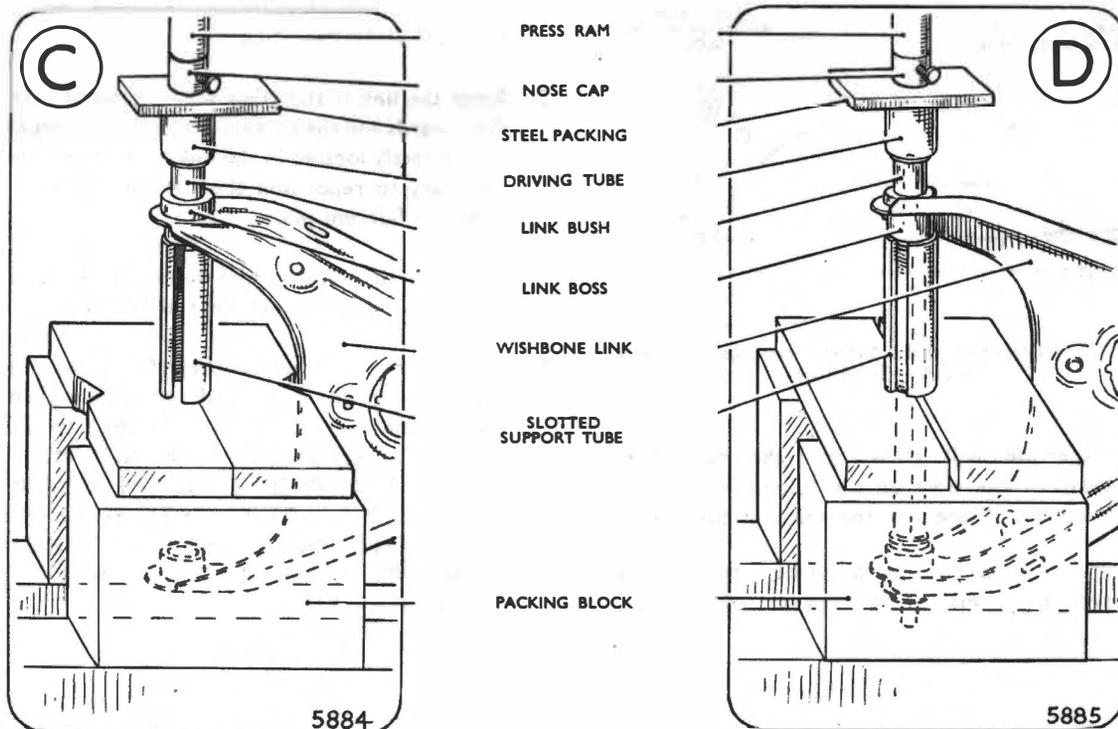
Illustrating method of fitting bushes to a link in a workshop press using special tool RG. 318
